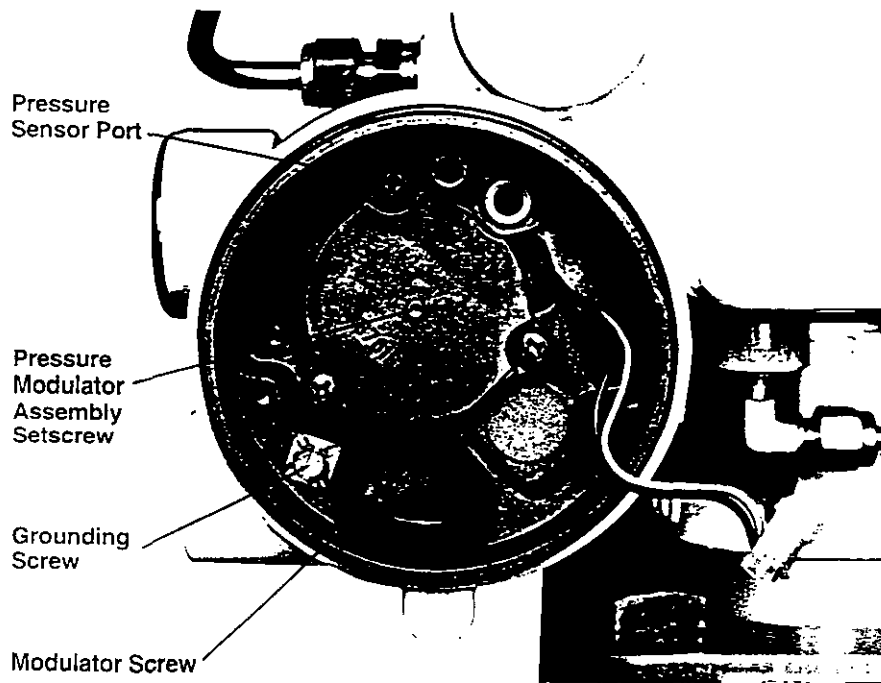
I/P Module Pressure Regulator (circuit board removed)
